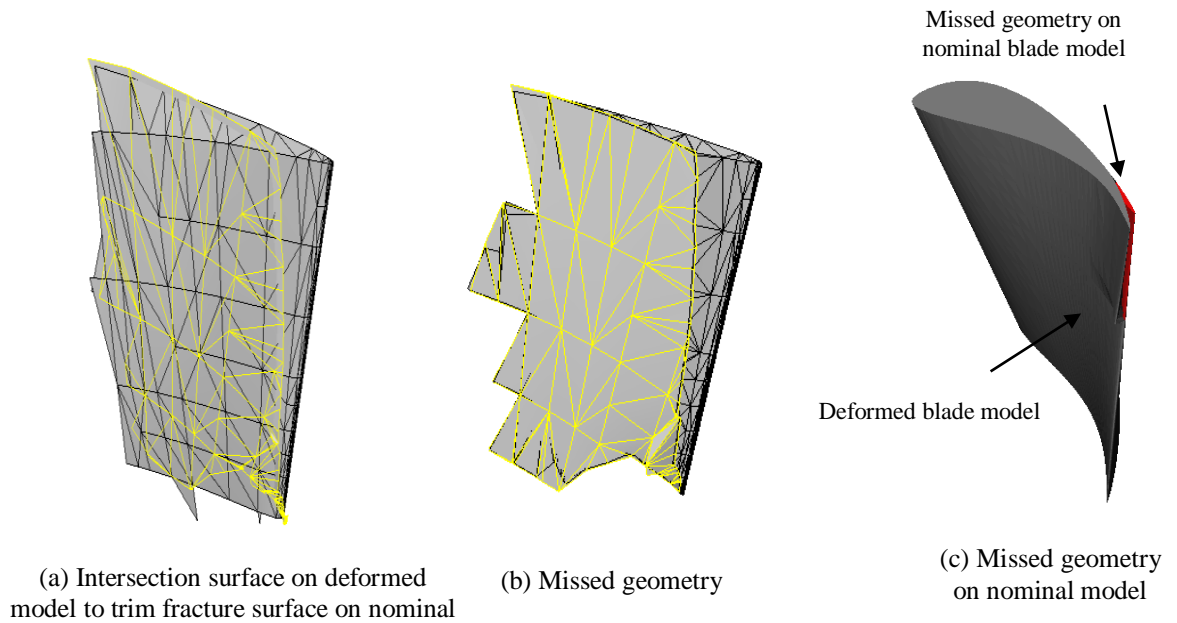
Intersection surface trim fracture surface on original blade
